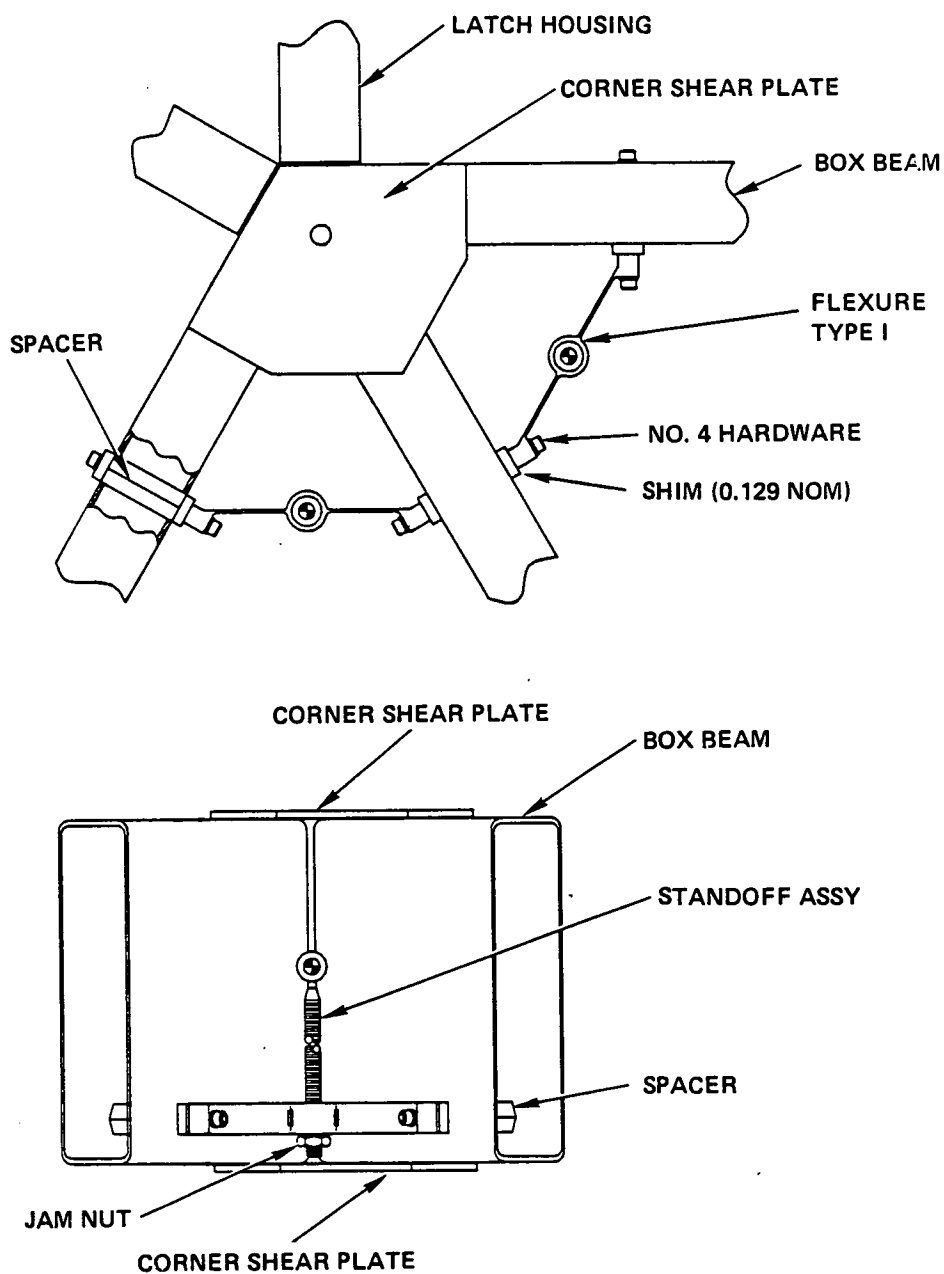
Threaded Beam Spacers Are Bonded Inside Of The Box Beams To Attach The Flexures. Spacer Is Shown In A Cutaway View In Upper Left Corner.
